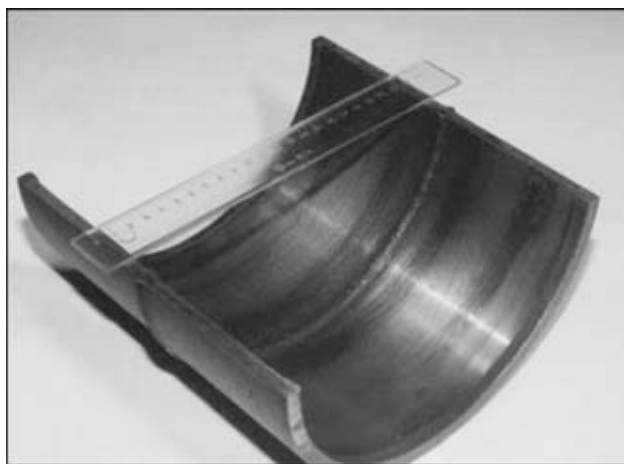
Section of welded joint of 219x8 mm pipe (time of welding is 38 s)
